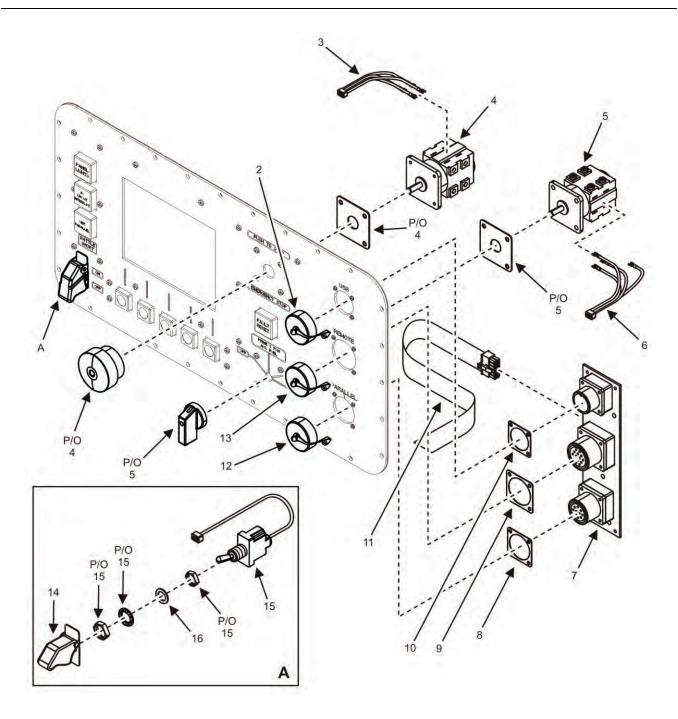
DCS Control Panel Assembly (Sheet 2 of 6).
